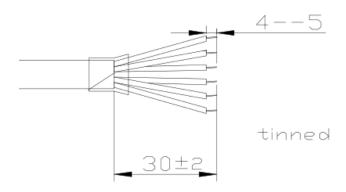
USBC-FS-RS232-0V-1800-WE Mechanical Details (dimensions in mm)
